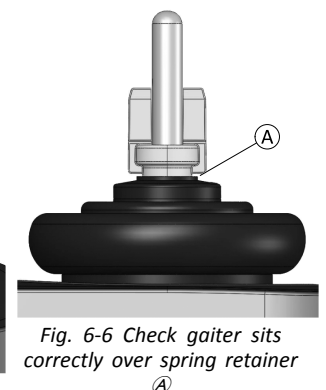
Check gaiter sits correctly over spring retainer A
